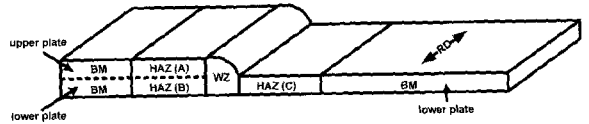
Diagram of MAG-welded DP590 sheet
